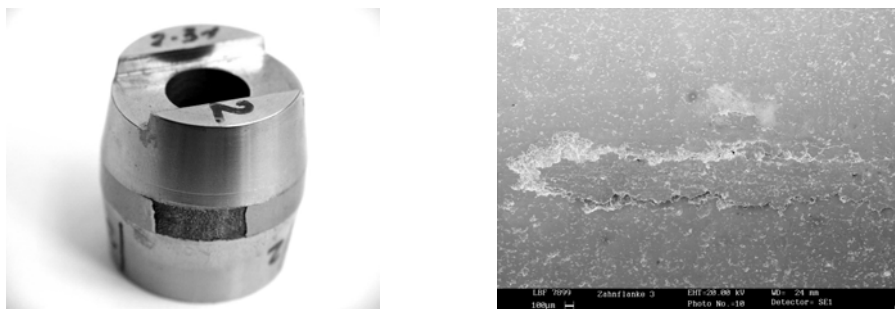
Failure appearances on test roller surfaces and gear flanks.
